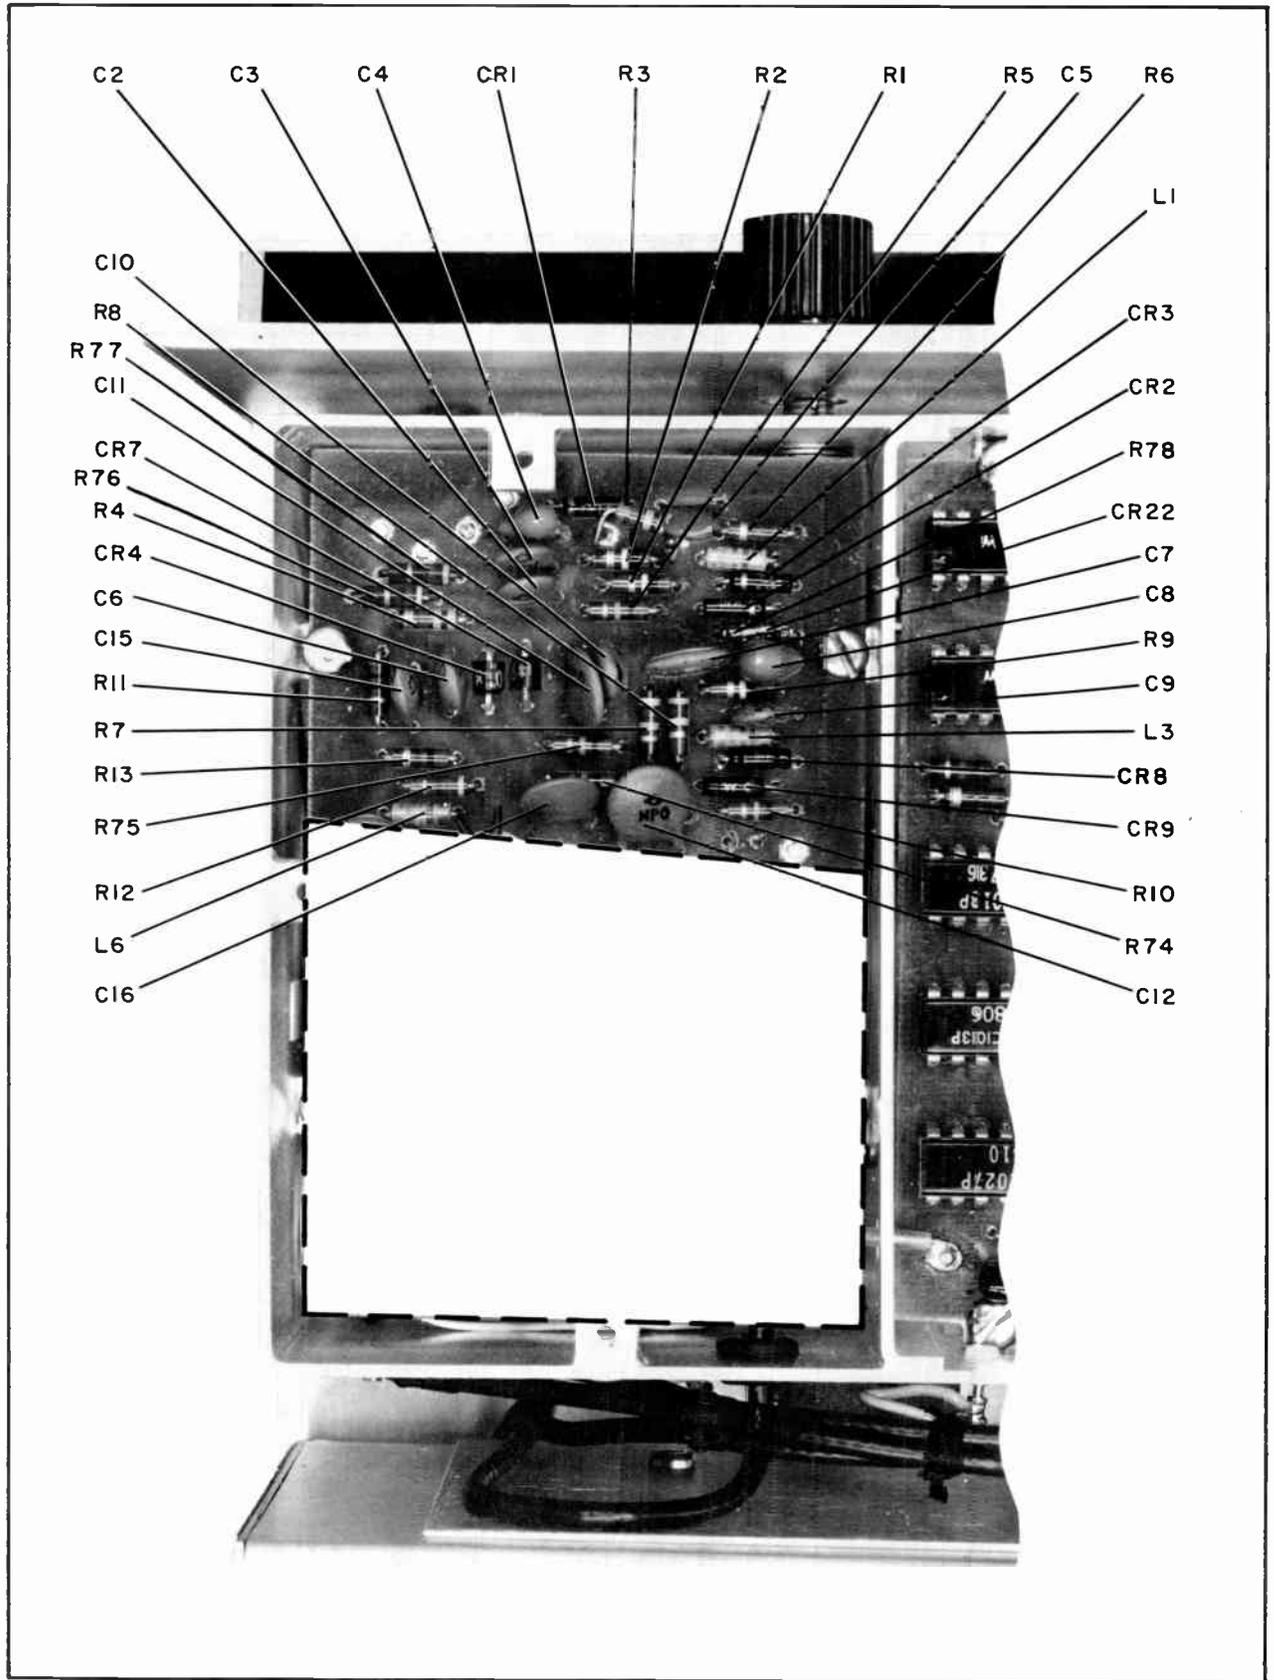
Exciter, Modulated Oscillator Board, Parts Location
